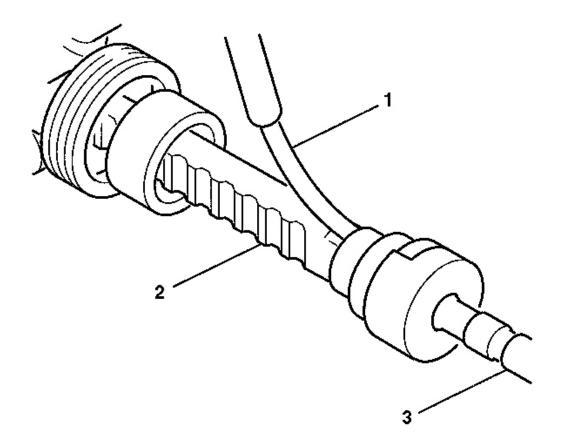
Inserting Gage Between Rack & Inner Tie Rod Housing Courtesy of GENERAL MOTORS CORP.
